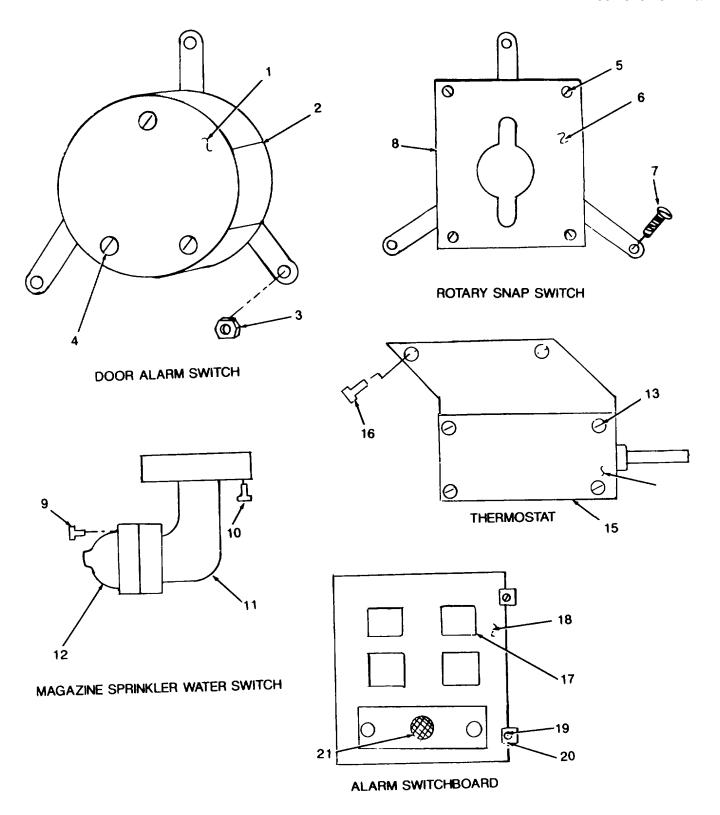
Arms Storage and Radio Room Alarm System (Sheet 2 of 2).
